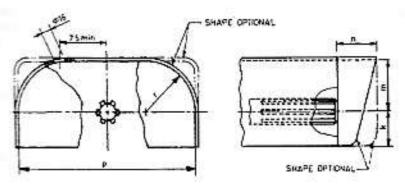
(b): DIMENSIONAL NOTATIONS FOR PTO SHAFT MASTER SHIELD
